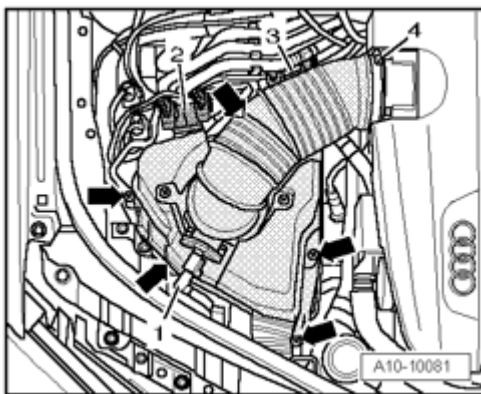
Mass Air Flow (MAF) Sensor G70 Electrical Connector, Upper Part Of Air Filter Housing Connections, Intake Manifold Air Duct Hose & Bolts
